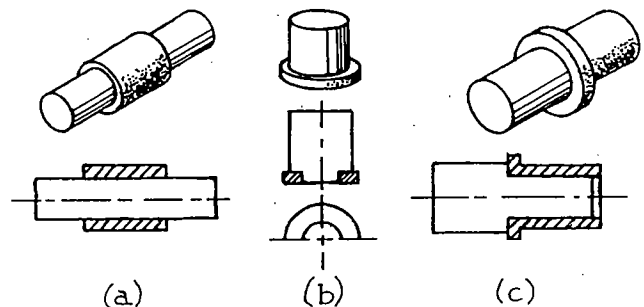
Different types of plain bearings: (a) a journal bearing; (b) a thrust bearing; (c) a flanged journal bearing.
